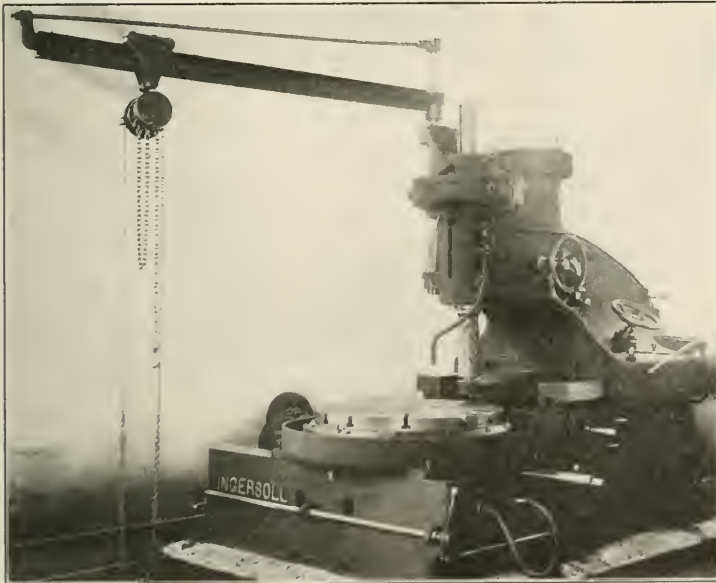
Ingersoll Vertical Milling Machine with Longitudinal, Transverse and Rotary Feeds
